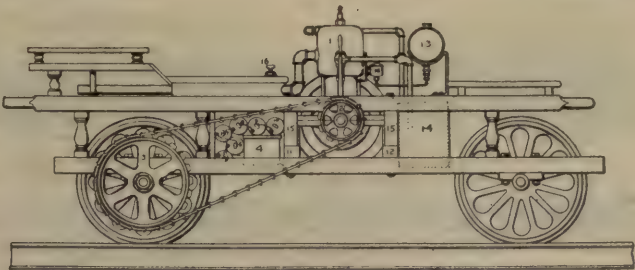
Velocipede Motor Car Fitted with Belle Isle Engine. Concrete Form & Engine Company.
